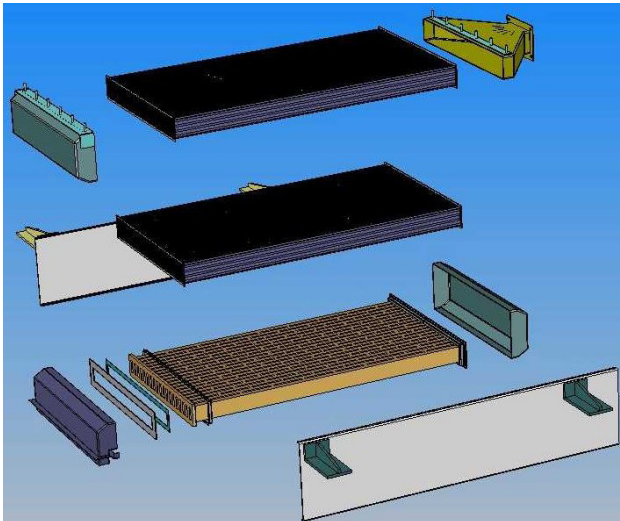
Exploded View of the Hybrid Heat Exchanger Concept
